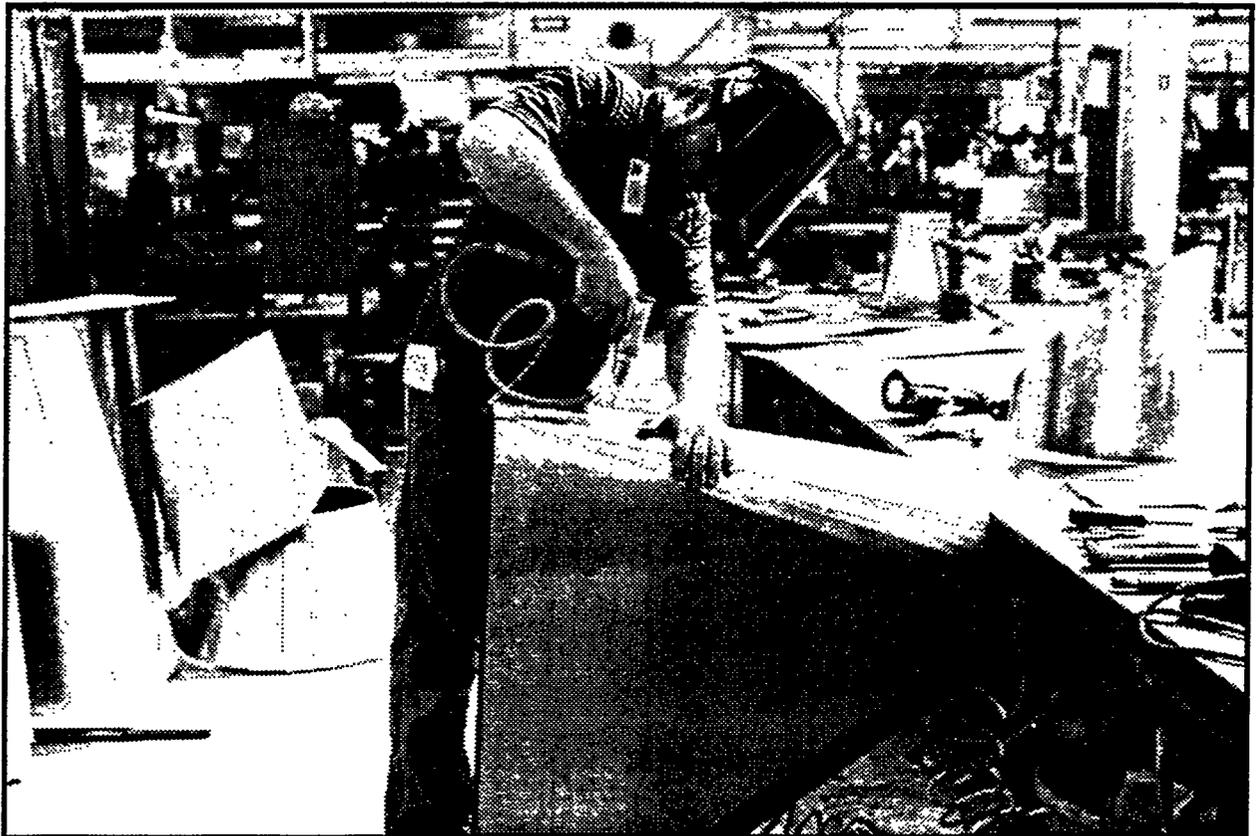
The sheetmetal shop constructs and repairs ventilation systems. Displayed is a sheet metal worker at the final assembly stage of construction in the shop.
